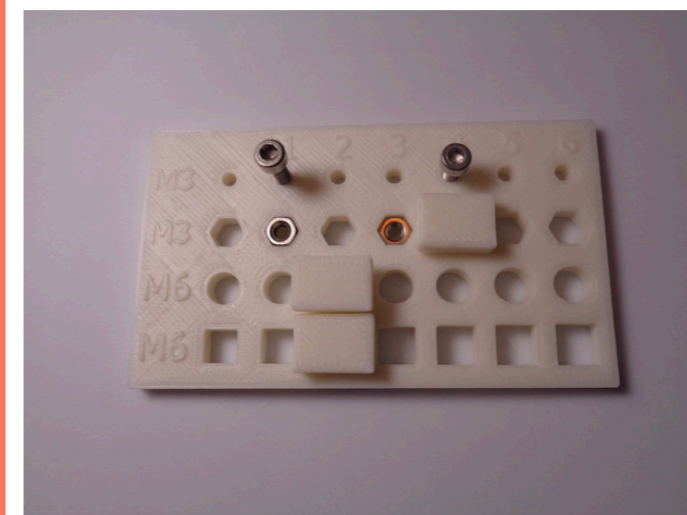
Hole tolerance / clearance calibration pieces.
